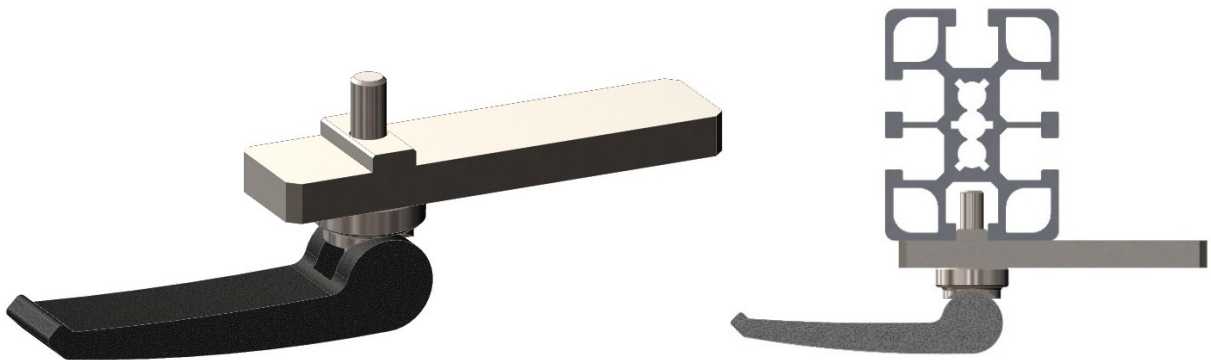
Pushing plate stopper. Stopper inserted into aluminum profile.
